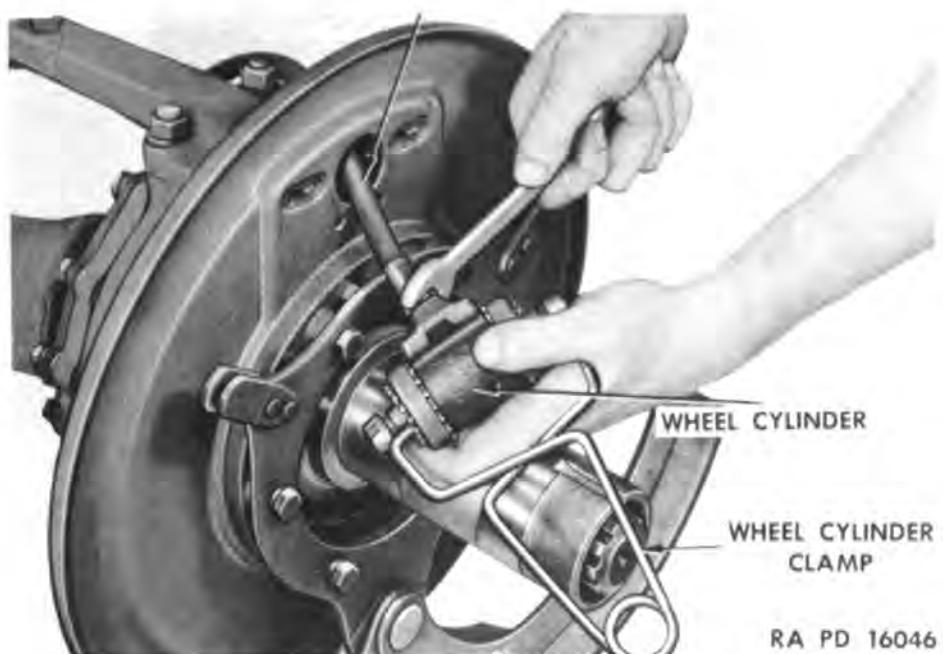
Removing Brake Flexible Hose from Wheel Cylinder
